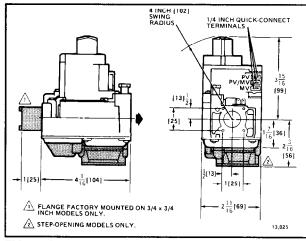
VR8304 DIMENSIONS IN INCHES AND [MILLI-METERS].
